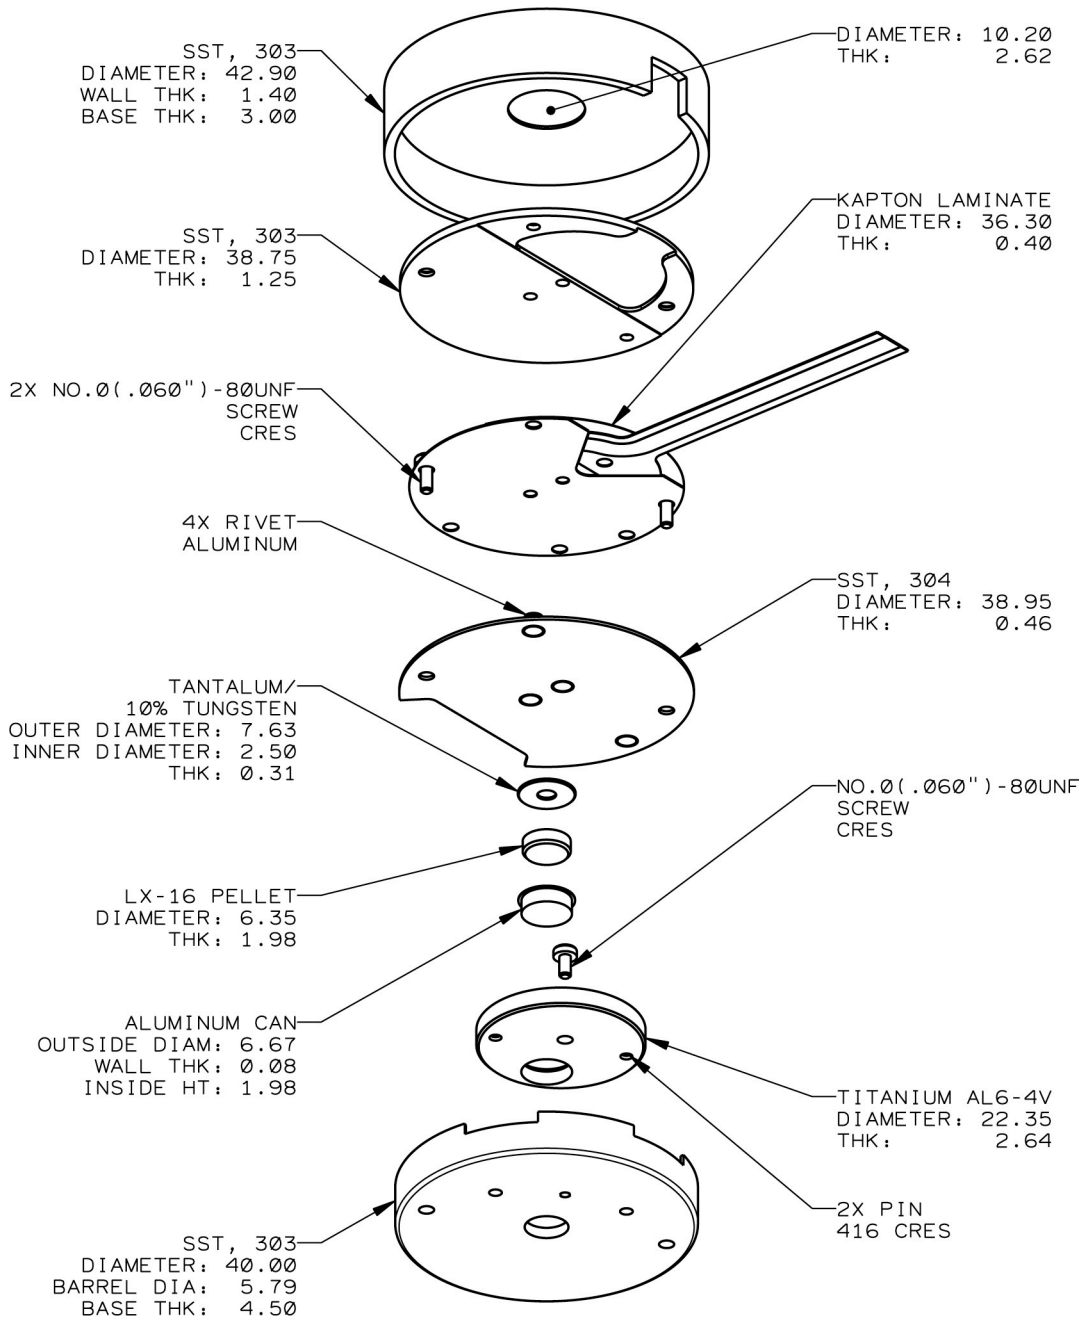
2021E PT3 & PT4 Shadowplate: Full Assembly Exploded Diagram
